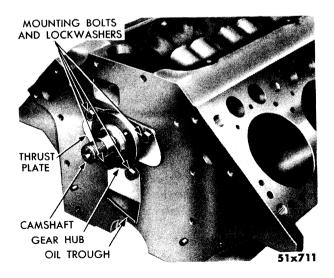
Camshaft Thrust Plate and Gear Hub Installed
